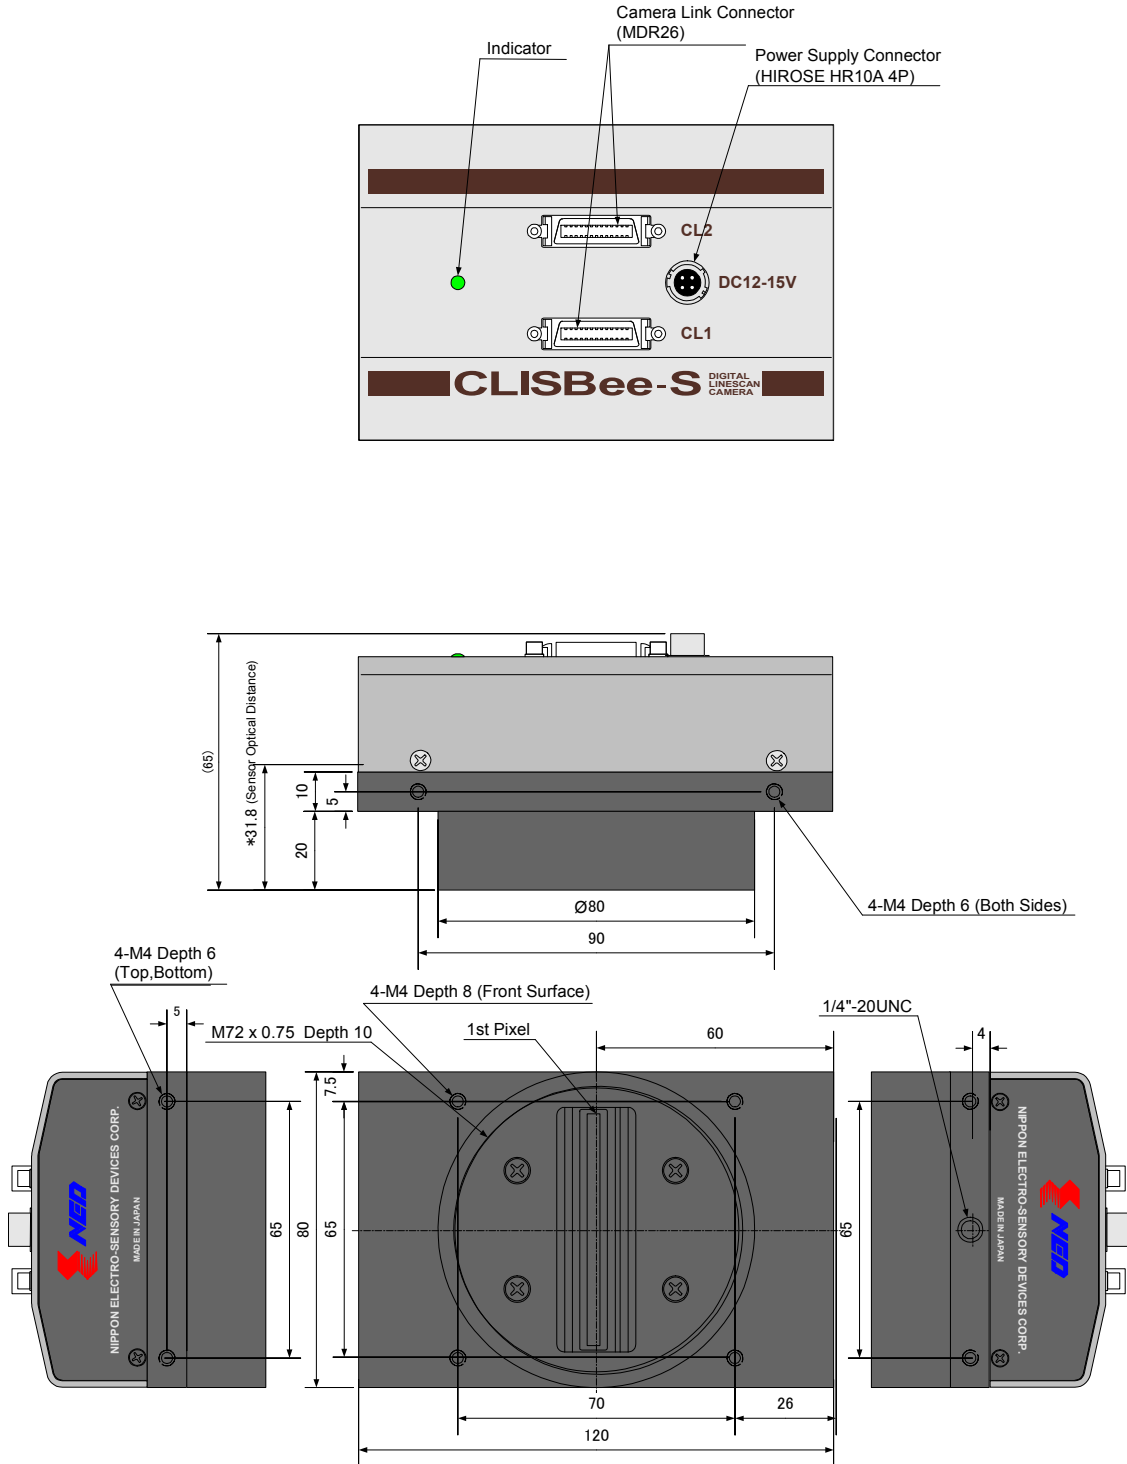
Dimensions (72x0.75 Screw Mount)
